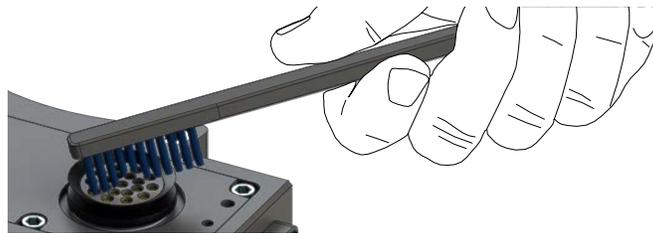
Inspect Master and Tool Pin Blocks
